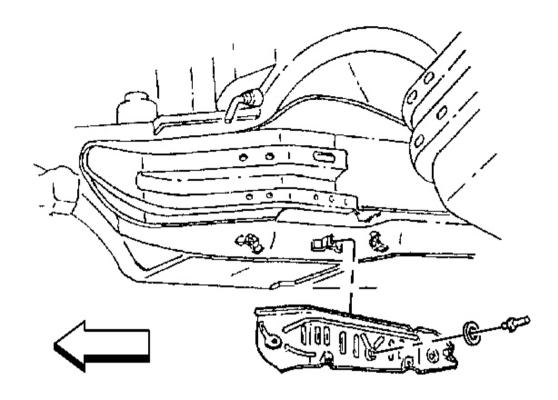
Catalytic Converter Heat Shield Rivets Courtesy of GENERAL MOTORS CORP.
